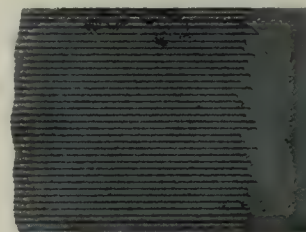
Block Planed on Planer Before Equipped With Lancashire Drive.
